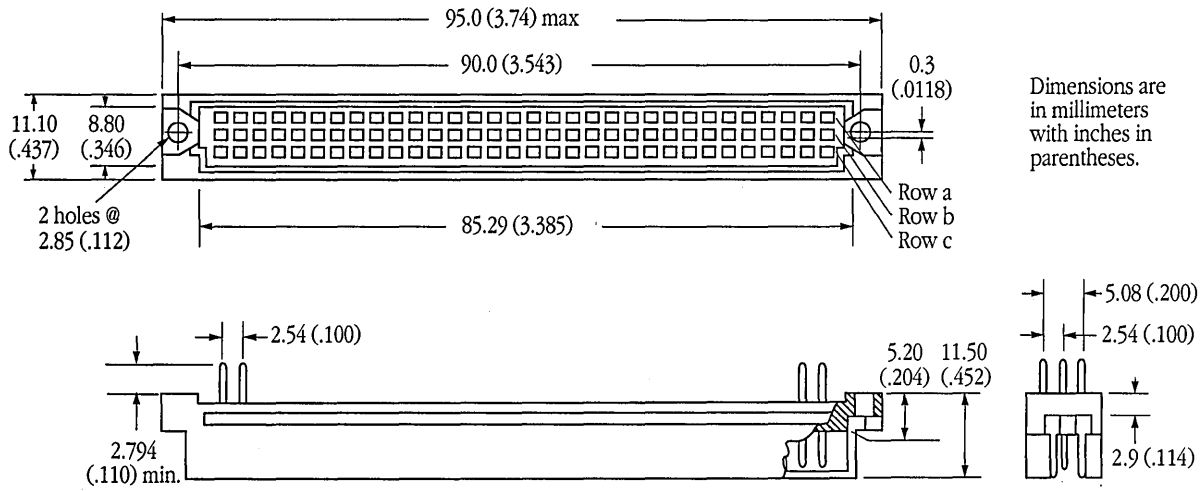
shows the 96-pin socket connector and mounting supports on the Macintosh SE main logic board assembly. Figure 15-6 is a detail of the socket connector used on the main logic board.
